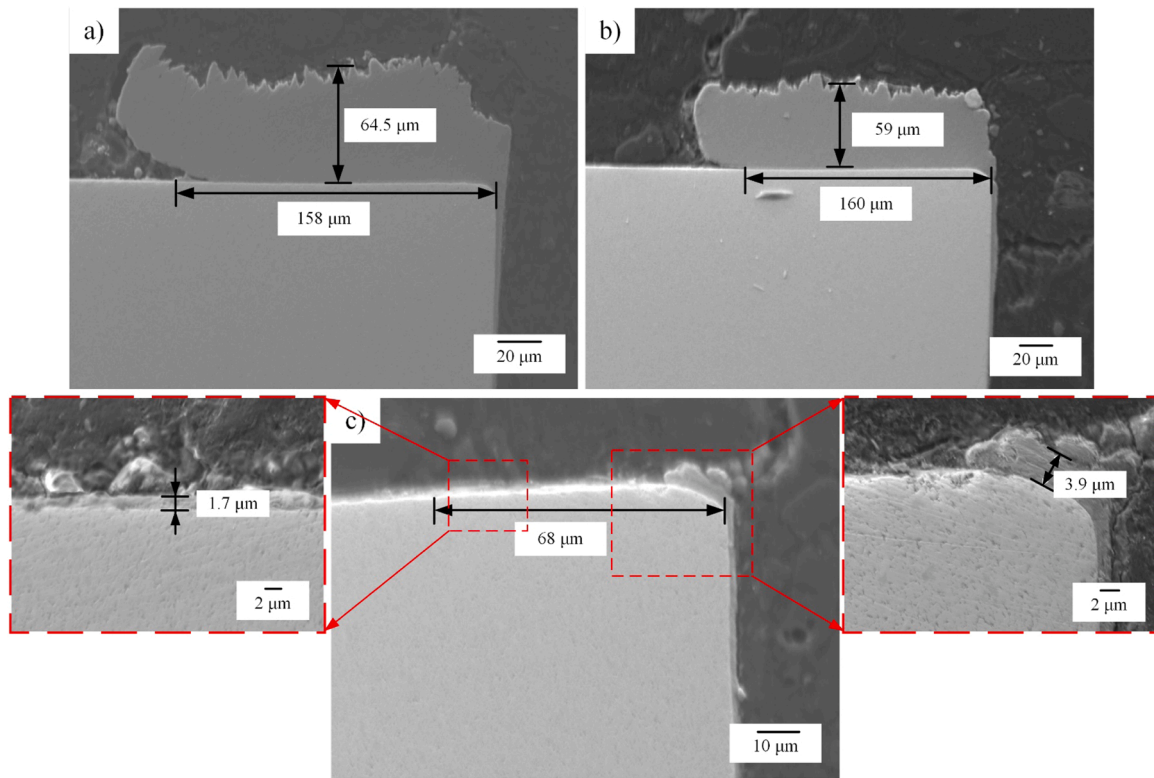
Sectional view of cutting tools under different cooling conditions, a) AD1, b) AF1 and c) AC1.
